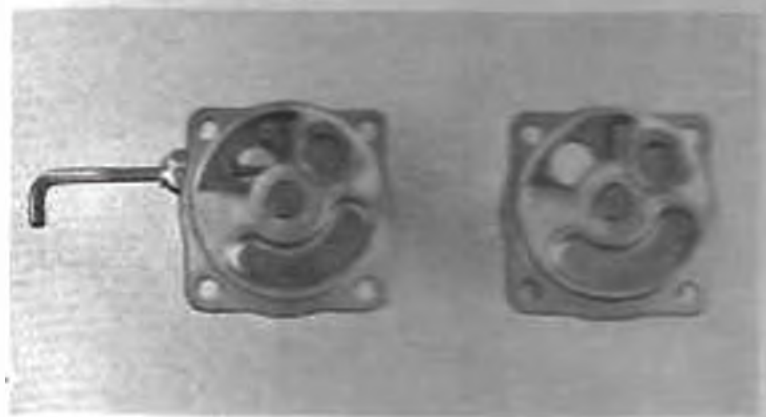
A modified .29 backplate assembly with a .49 intake and new type needle valve (left). Standard .29 Redhead rotor and backplate (right).
